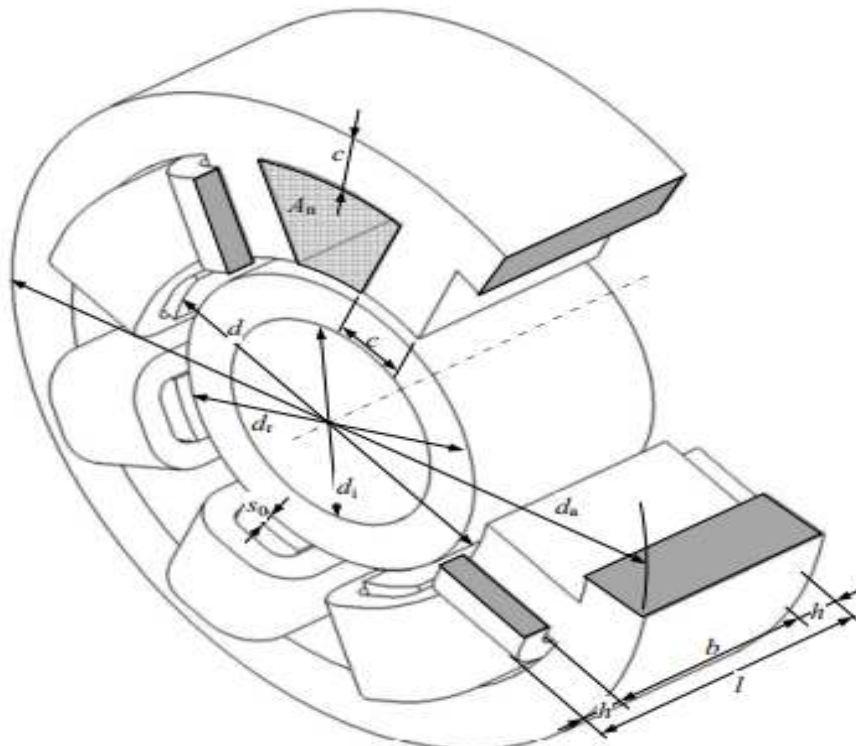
Typical geometry of the radial magnetic bearing; d : Inner diameter (bearing diameter); d_a : Outer diameter, d_i : Shaft diameter; c : Leg width; h : Winding head height; b : bearing width (magnetically active); d_r : Rotor diameter; A_n : Slot cross section (winding space); S_0 : Nominal air gap
